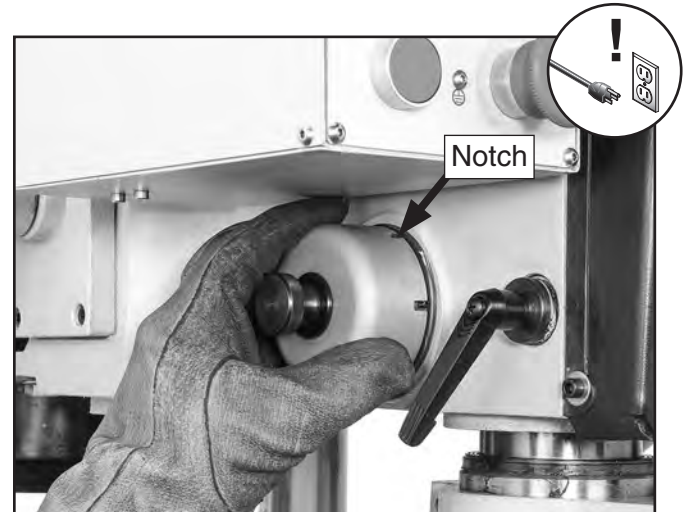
Adjusting spring tension by rotating spring cover to engage next notch with roll pin.
